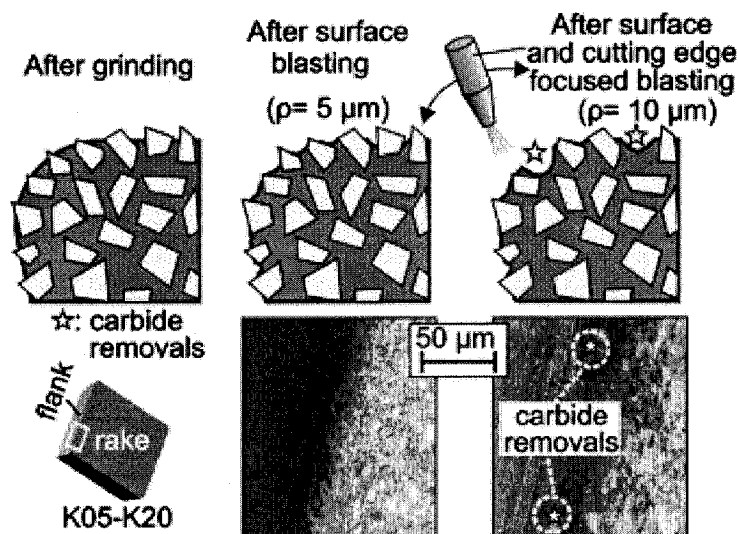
Cutting edges after surface blasting as well as after surface and focused on the cutting edges blasting. (K.-D Bouzakis et al., 2003)
